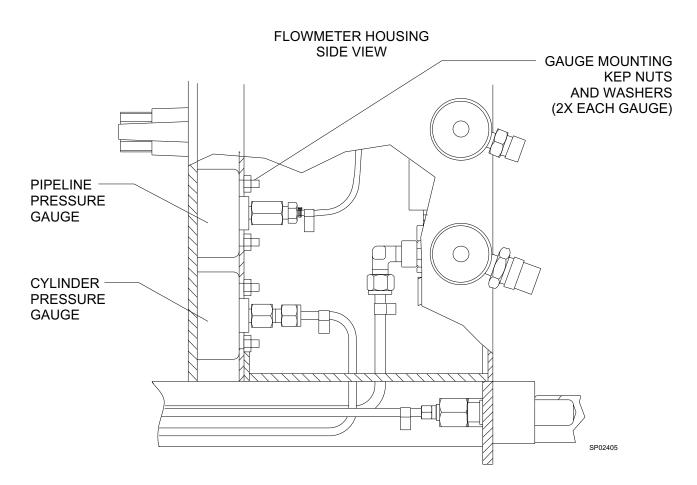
AIR CYLINDER AND PIPELINE GAUGE MOUNTING
